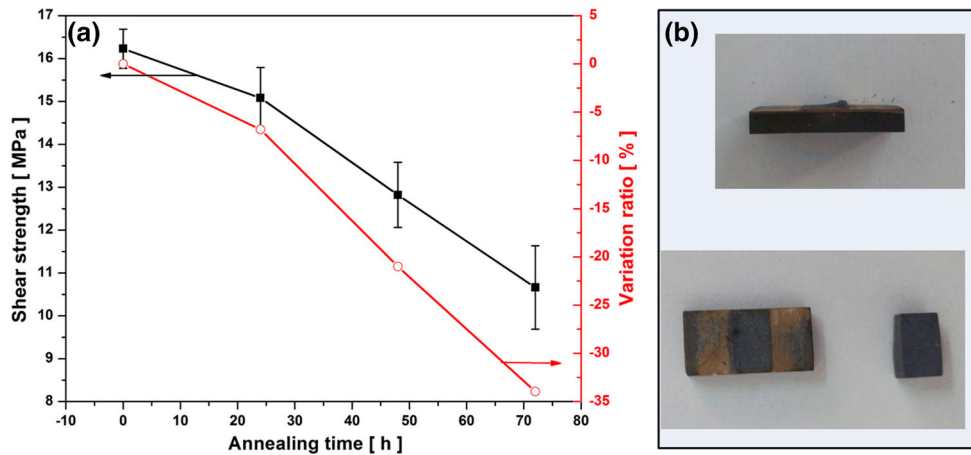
Shear test results: (a) variation of shear strength of Mg₂Si/Cu joints with aging duration (at temperature of 500°C); (b) fracture surface of Mg₂Si/Cu samples after shear test.
